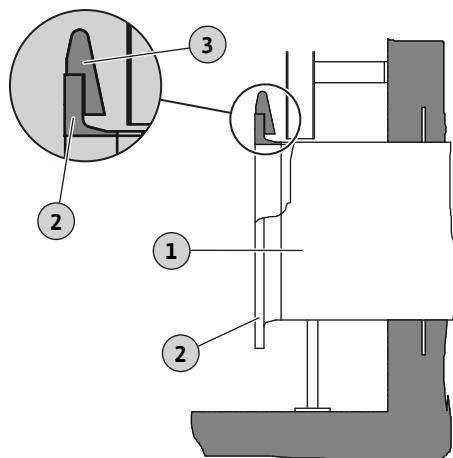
Pressure wedge: Discharge pipe with weld neck flange
